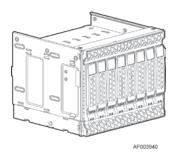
8x2.5" Hot-Swap Hard Disk Drive Cage
